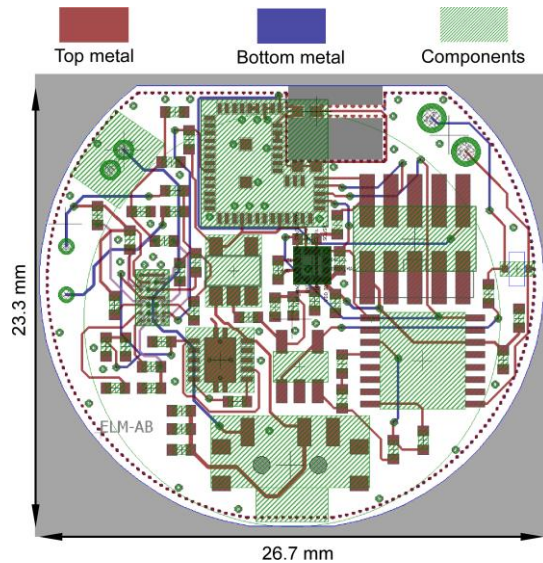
Layout of the ELM7 PCB (diameter: 26.7 mm).
